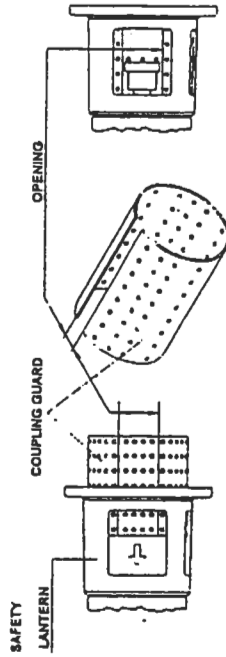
PREPARING TO ASSEMBLE THE MONOBLOCK DESIGN
